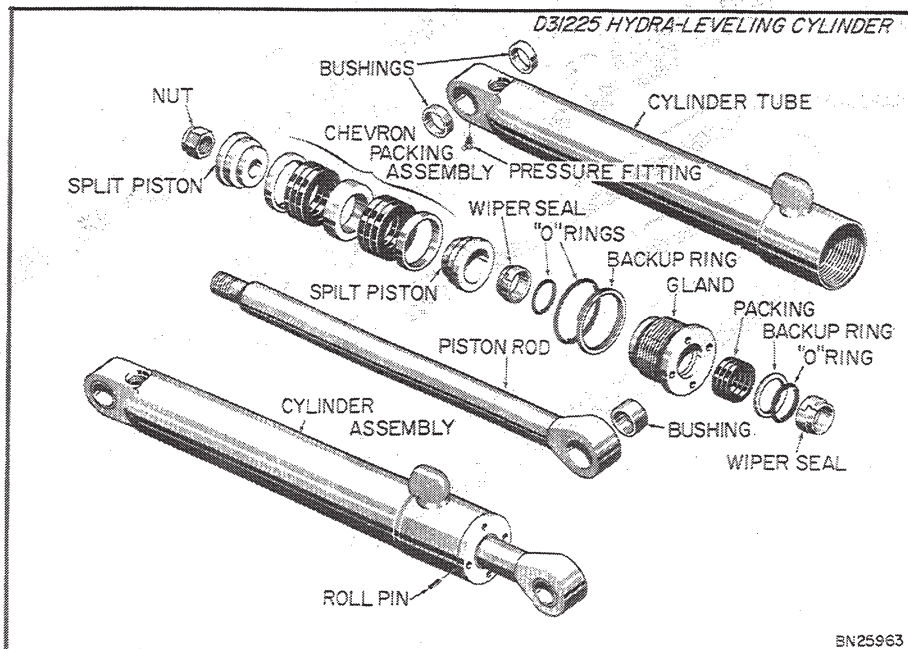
Exploded View of Hydra-Leveling Cylinder
